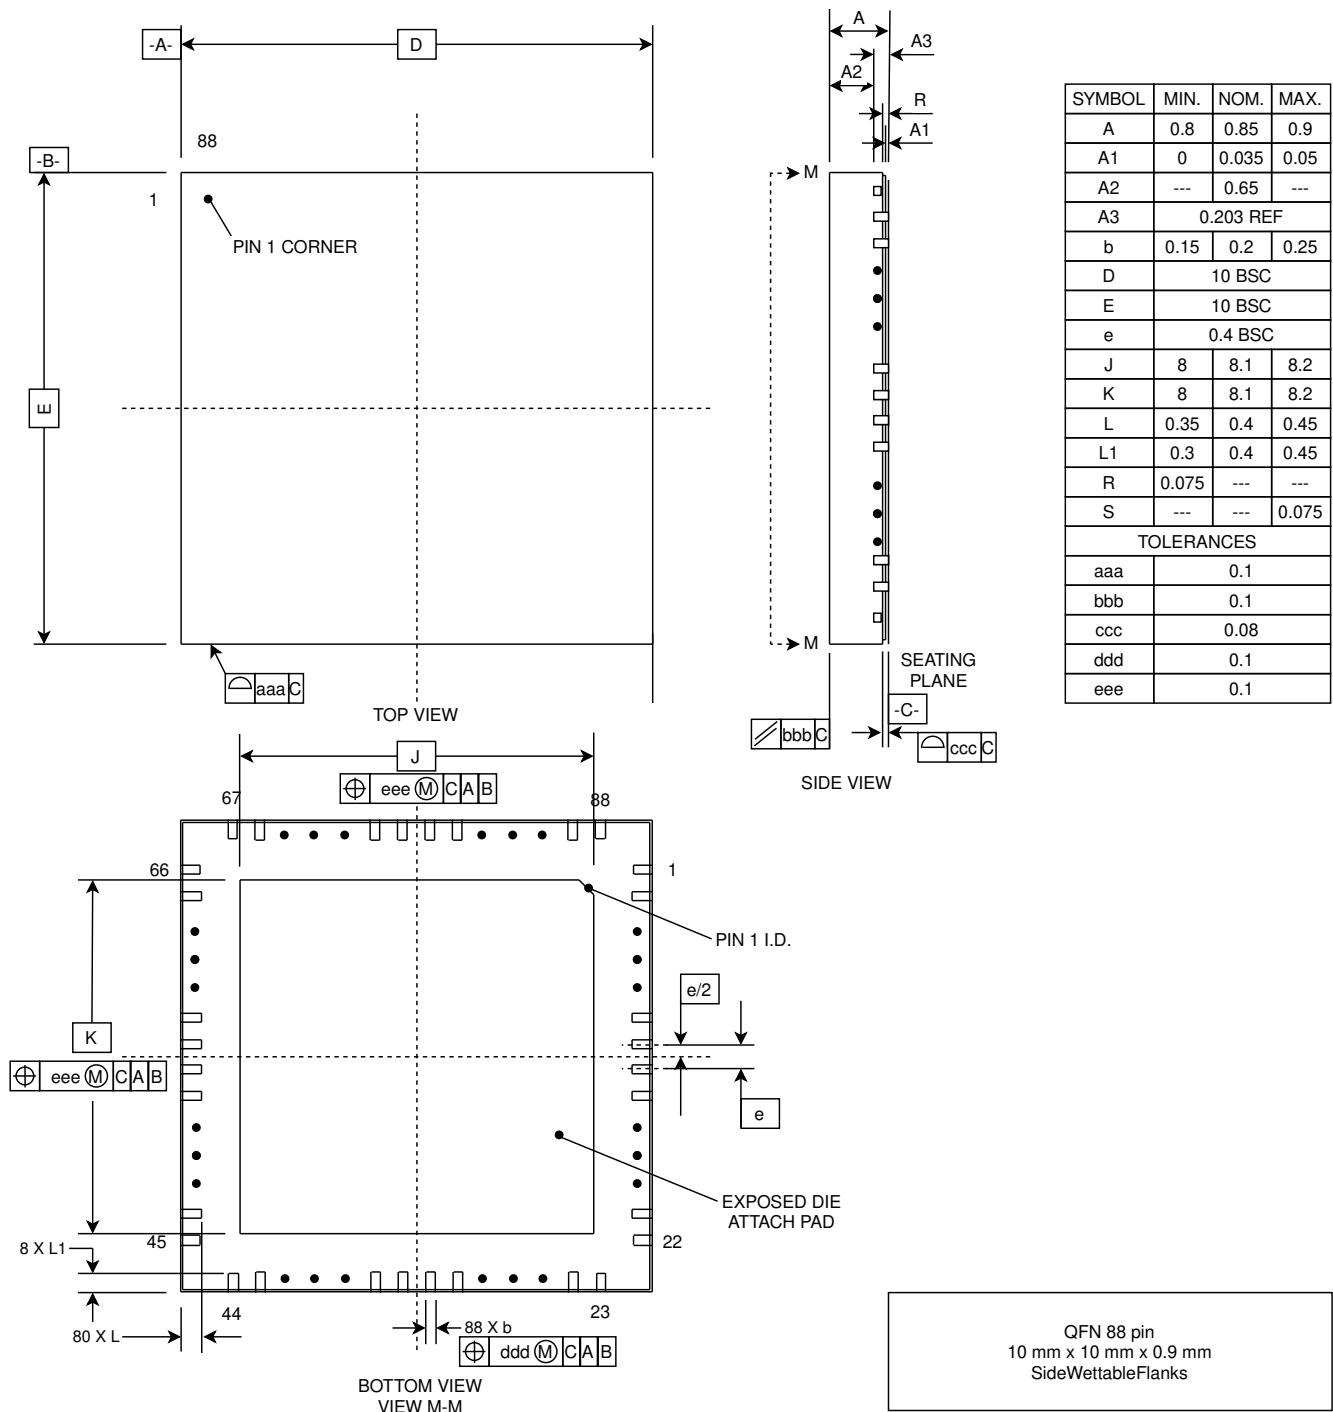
QFN88 10x10x0.9x0.4 Package Drawing
